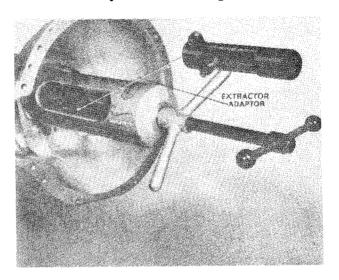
Extracting Constant Pinion Shaft Assembly with Churchill Tool No. 20SM66A.
